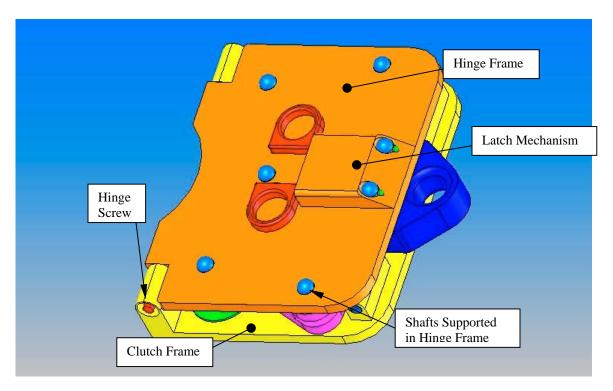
Hinge Frame in Closed and Latched Position: showing each shaft that passes through the hinge frame is supported
